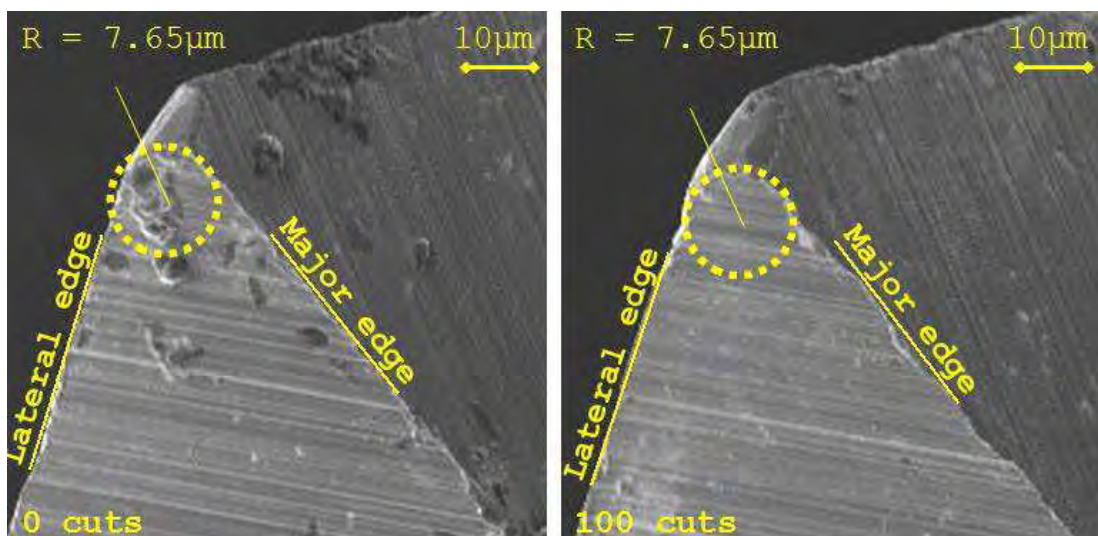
GT° extreme tooth tip pre and post 100 cuts
